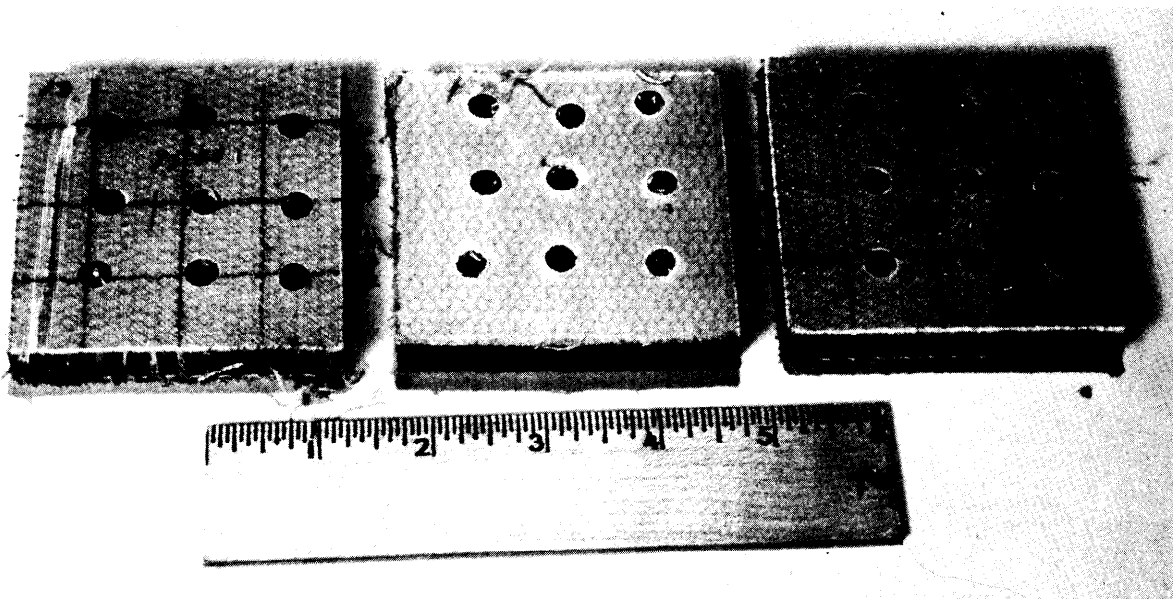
DRILL: .250 SPADE DRILL
